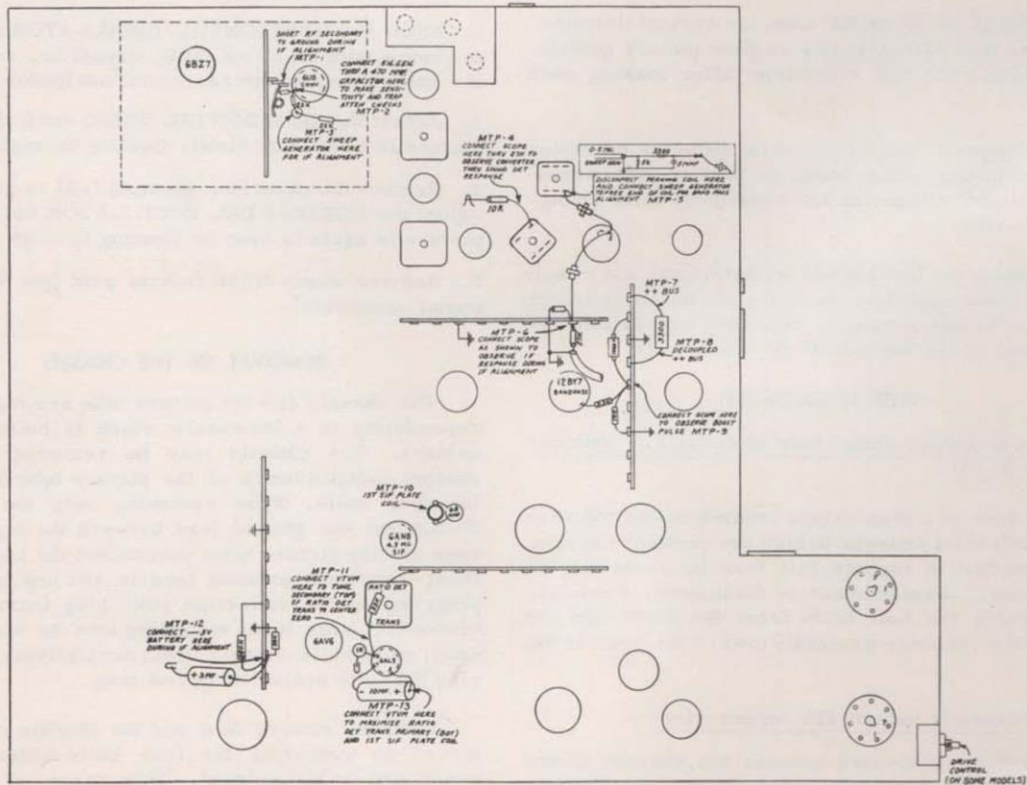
TS-902 HORIZONTAL CHASSIS (BOTTOM VIEW)
